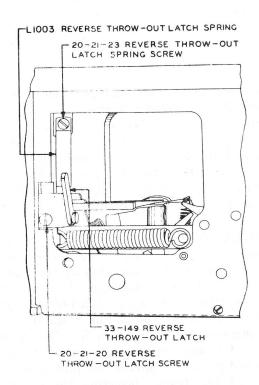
Reverse Throw-Out Latch Mechanism
